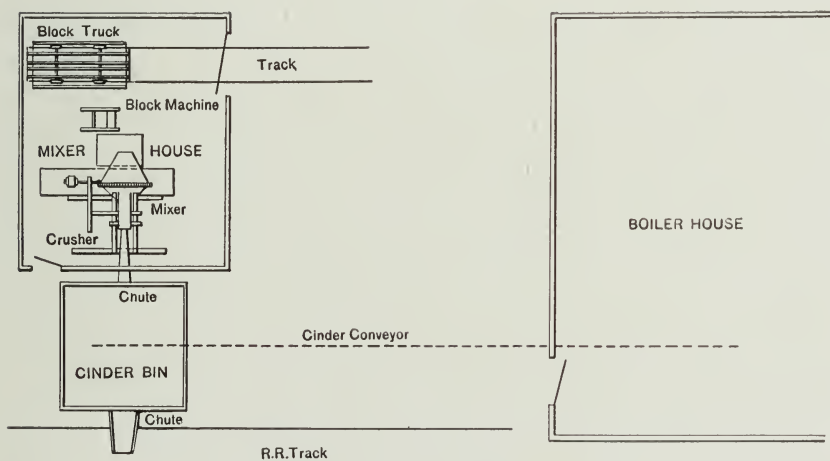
Arrangement of plant for making concrete blocks. (After Ross).
